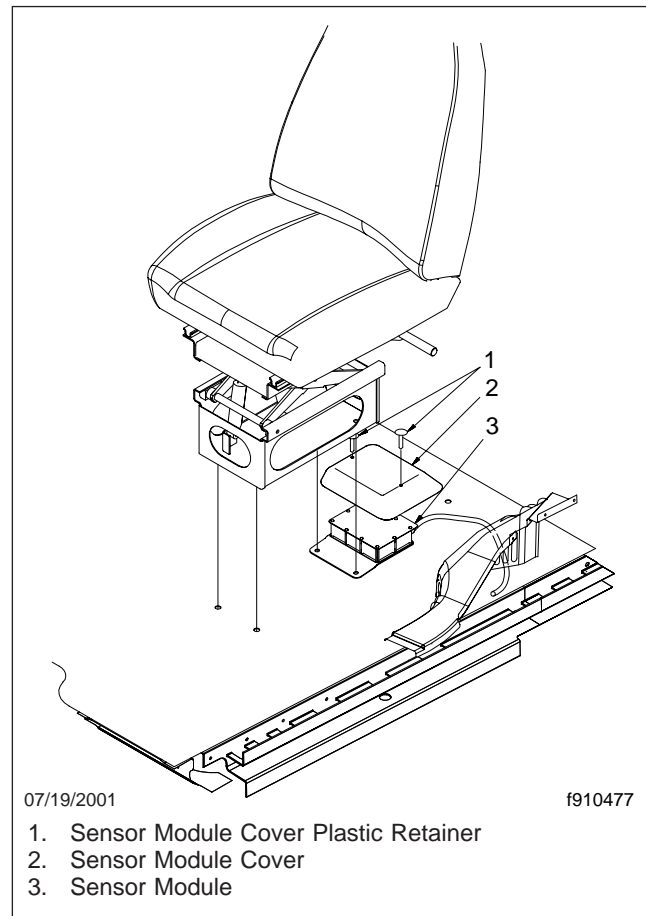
, Nonproprietary Seat With Air Bag Sensor Module
